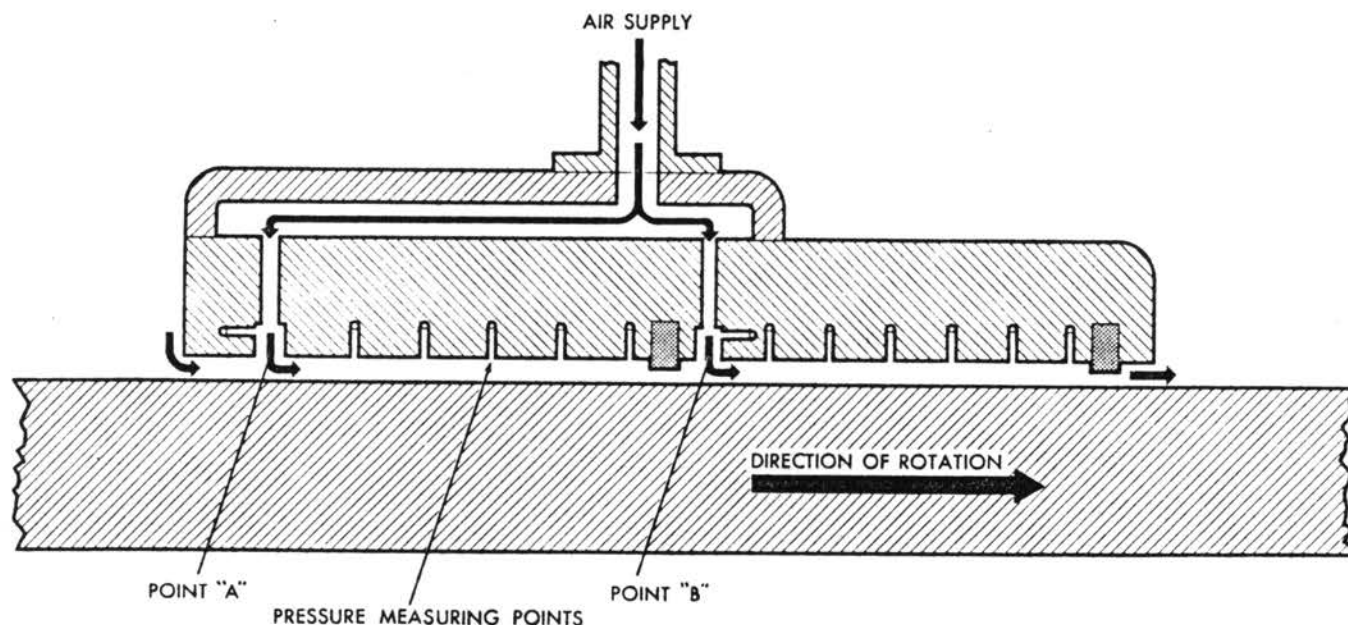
SECTION DIAGRAM OF BEARING PAD
